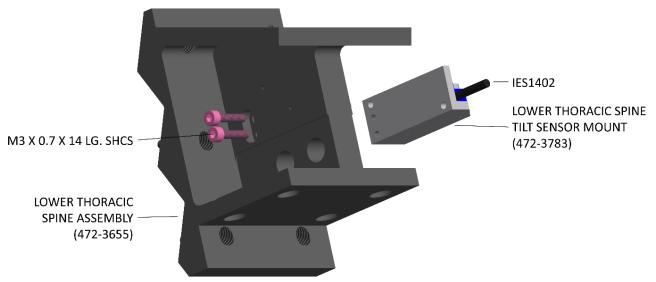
Lower Thoracic Spine Tilt Sensor Mount Assembled to Lower Thoracic Spine Assembly
